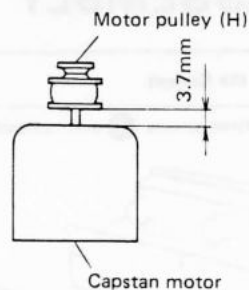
Diagram showing the positions of the motor and motor pulley (H)
